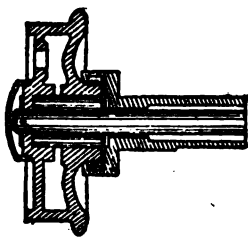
SEC. 10bb.—Solid roller bearing wheel.
